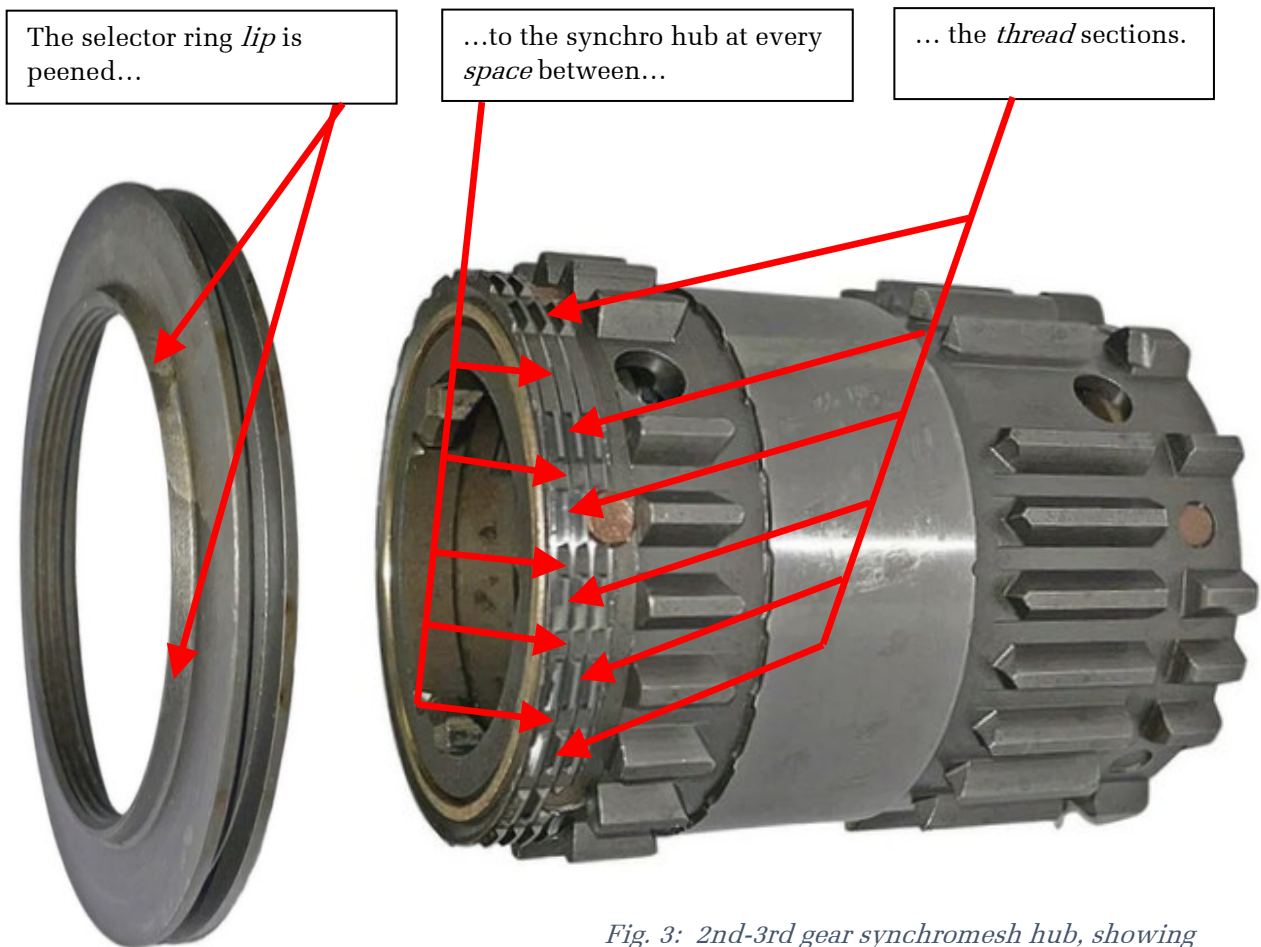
2nd-3rd gear synchromesh hub, showing the peening spaces in the thread sections.
